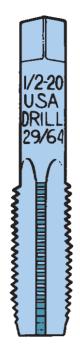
Many taps, especially larger ones, have the tap drill size printed on the top.
